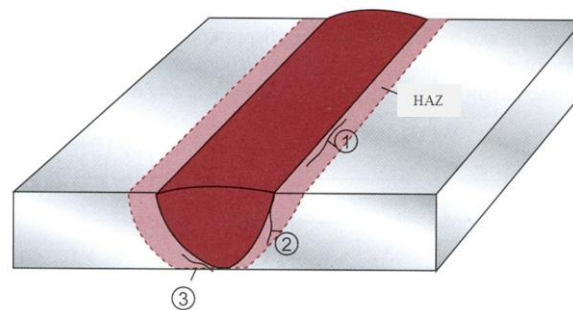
Weld metal cracks in HAZ due to hydrogen induced cracking (1) underbead cracking, (2) toe cracking, (3) root cracking.[49]
